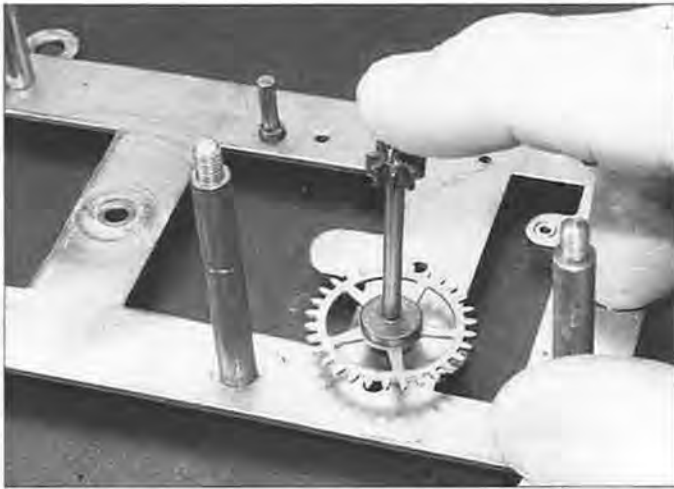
Part of the motion works. This one shows essentially no wear. A racked movement would probably stop the clock from this pivot.
